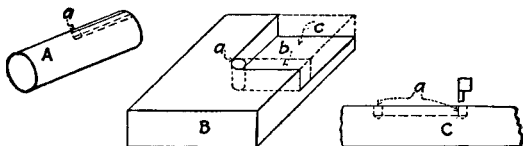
In *A*, the diameter of the drilled hole (*a*) equals the width of the keyway. In such a job as *B*, first drill a hole at (*a*), say  $\frac{1}{4}$  in. in diameter; next, machine the slot (*b*); then machine the remainder (*c*), the cut ending in slot (*b*). Such a job as *C*, requires a drilled hole at the beginning and also at the end of the keyway. Keyways such as those shown in *A* and *C* are cut more easily in the milling machine, but occasionally must be cut in the shaper or the planer.
